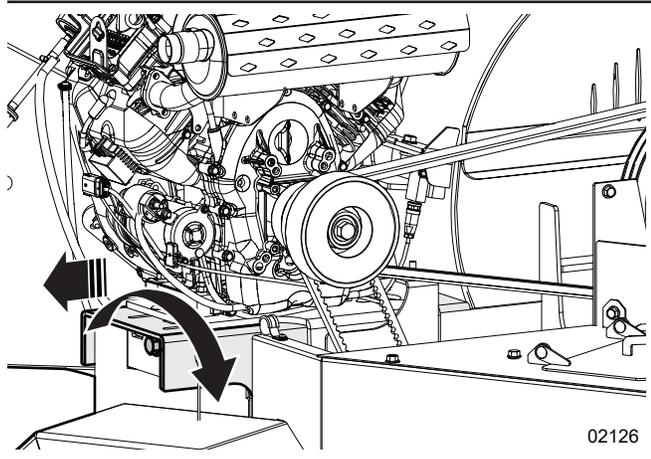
Rotor drive-belt tensioning bolt - clockwise
